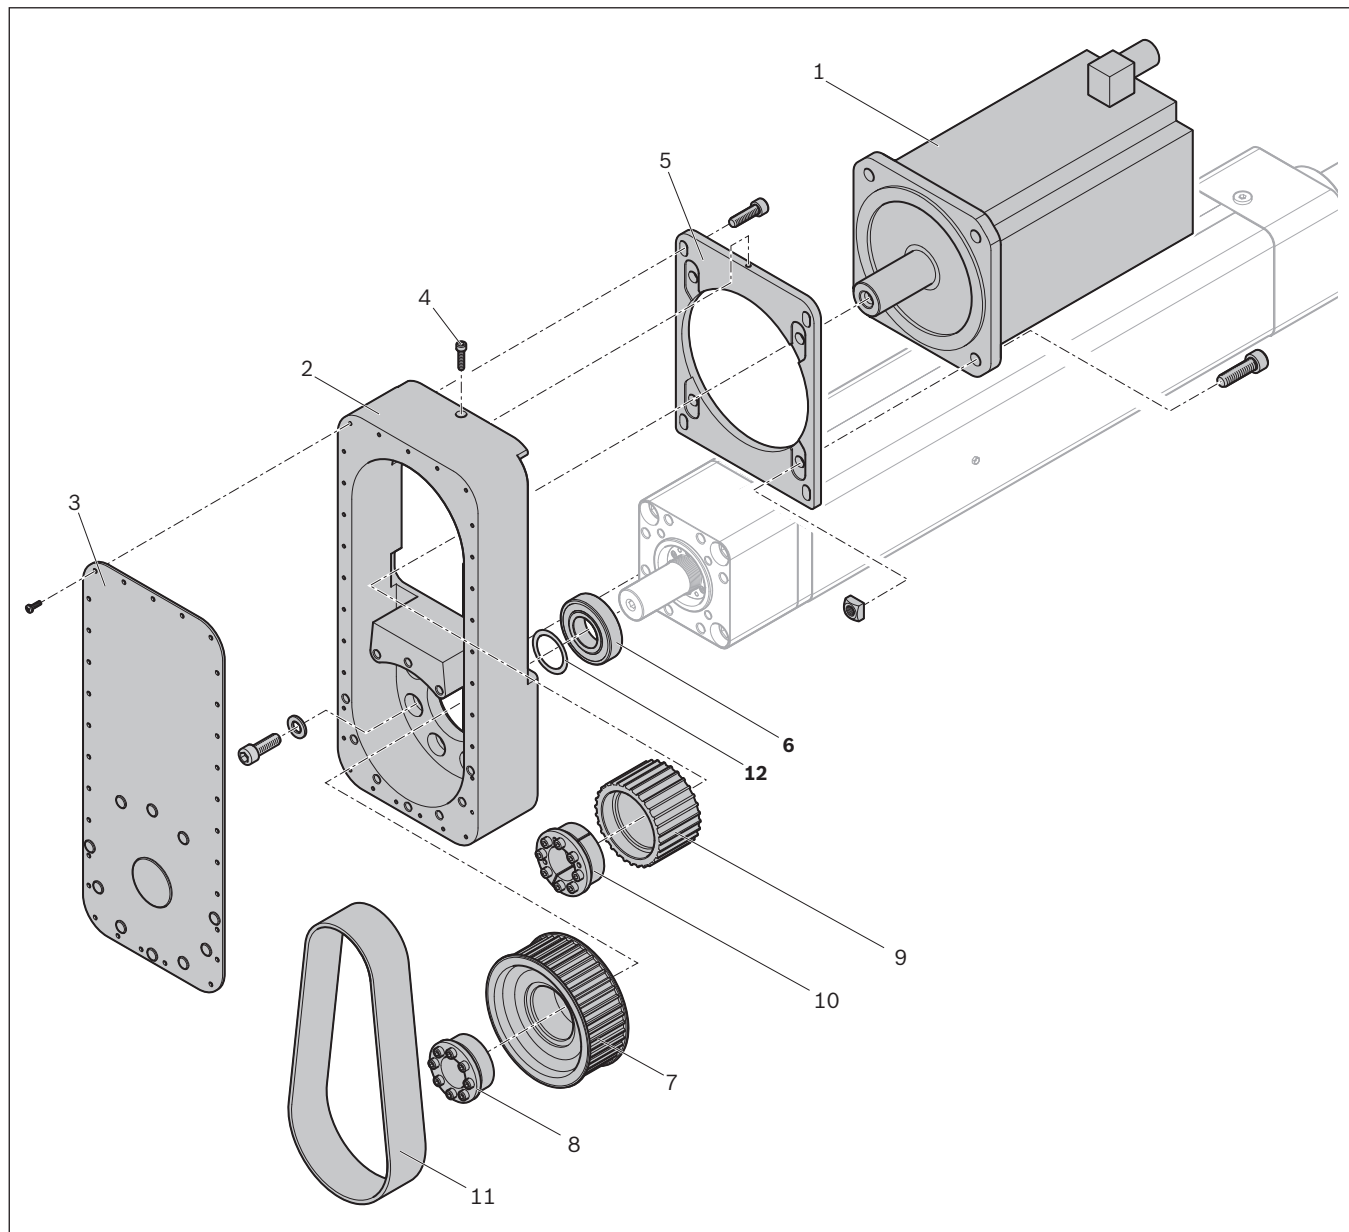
Mounting the belt side drive and motor on the EMC-HP
